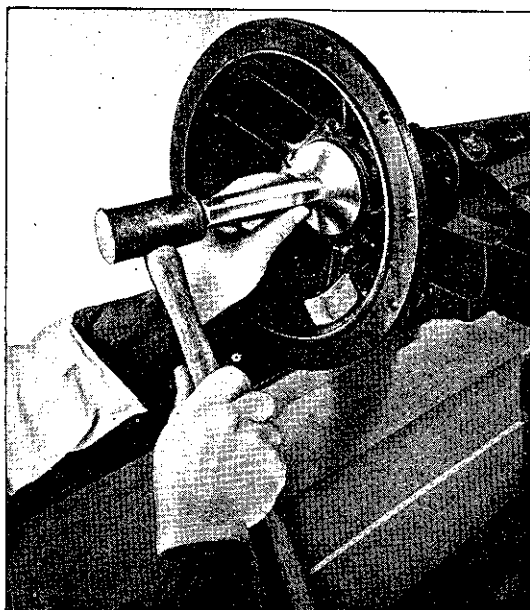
DIFFERENTIAL BEARING CUP DRIVER
